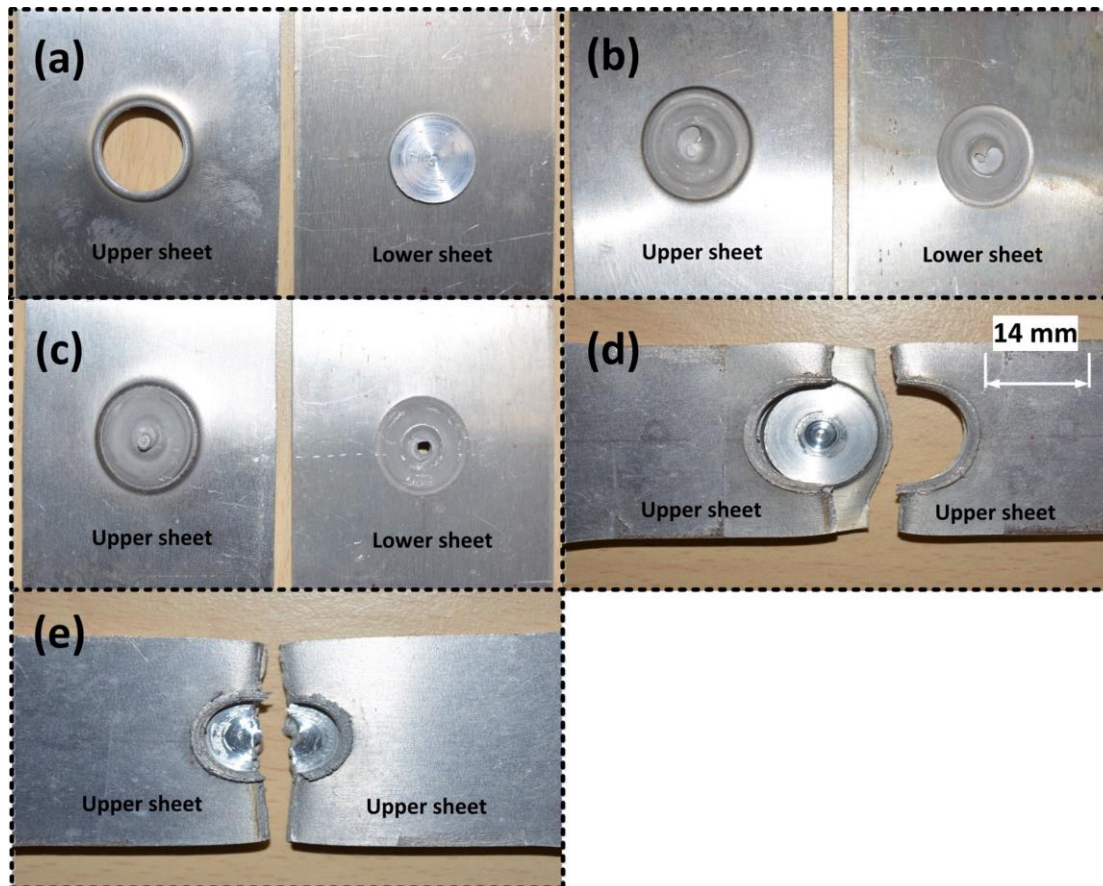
Modes of failure. (a) Tear off, (b) Combined pin shear and bond de-lamination, (c) Combined pin pullout and bond delamination, (d) Base metal fracture, (e) Stir spot fracture
